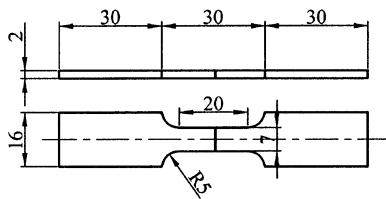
Configuration of tensile specimen with CO<sub>2</sub> laser welded butt joint.
